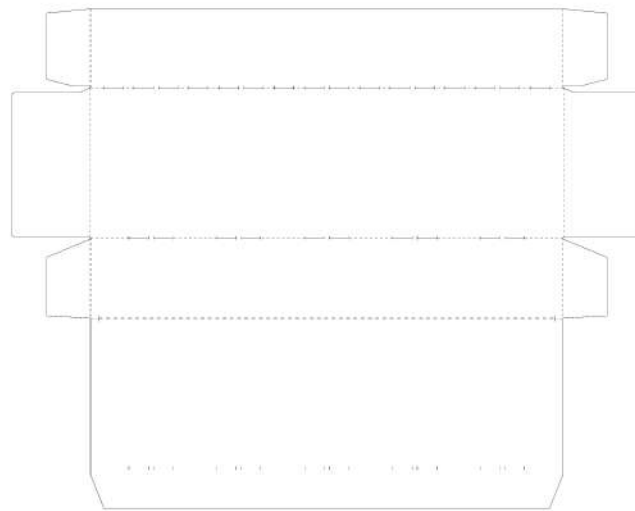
A technical drawing separation containing the outlines of a packaging.
